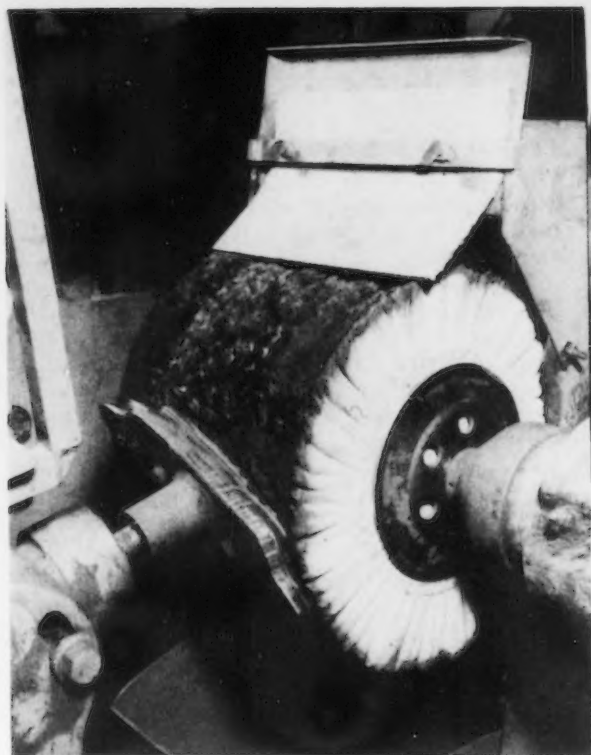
Oldsmobile rear deck ornament is mounted on a pivoted fixture which will slowly rotate the piece during buffing.
